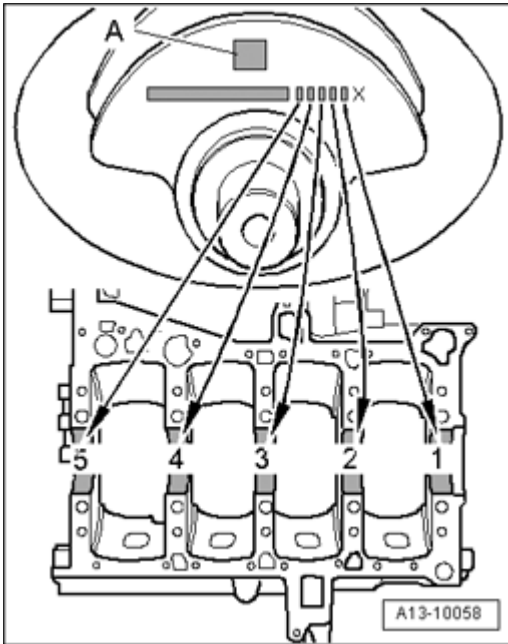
Allocation Of Crankshaft Bearing Shells For Guide Frame - Version II
